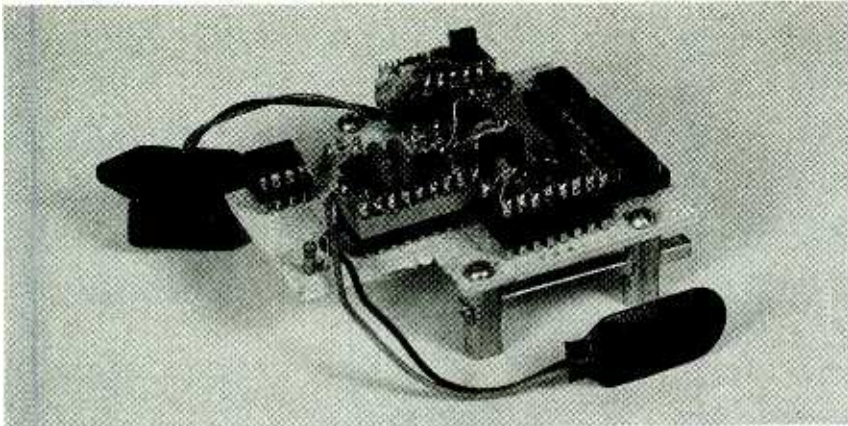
PROTOTYPE CARD GUIDE/PC BOARD ASSEMBLY. This was assembled on perforated construction board so the component layout does not match the PC-board. The card guide would be the same design for either construction method.
